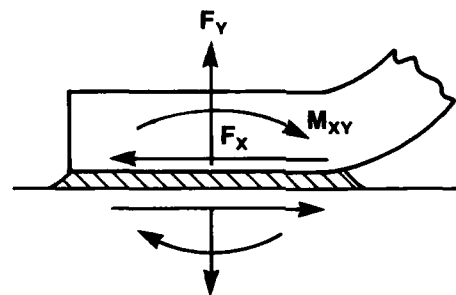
Forces transmitted to solder joint from gull-wing lead.
